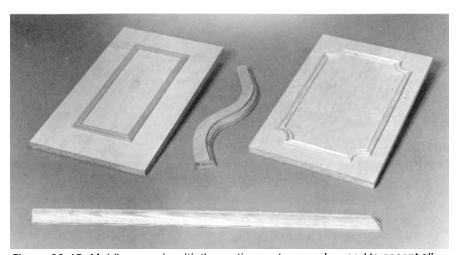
Moldings made with the routing system can be used to accent all types of projects like these.
